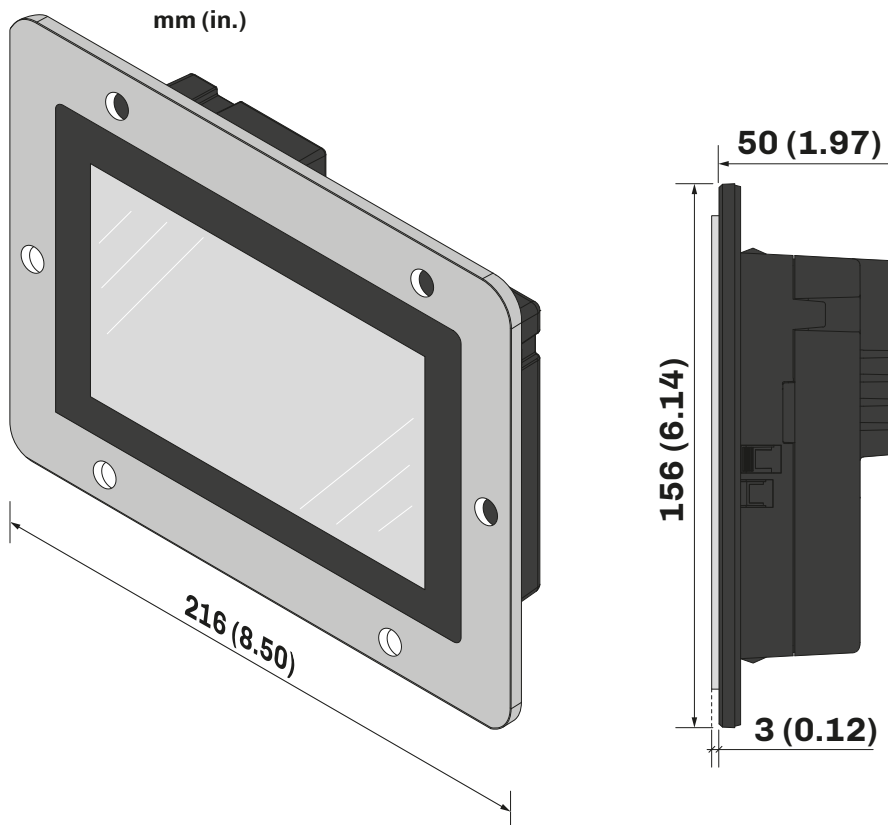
Panel-back mounting Vcolor 229-249 L user interface dimensions
